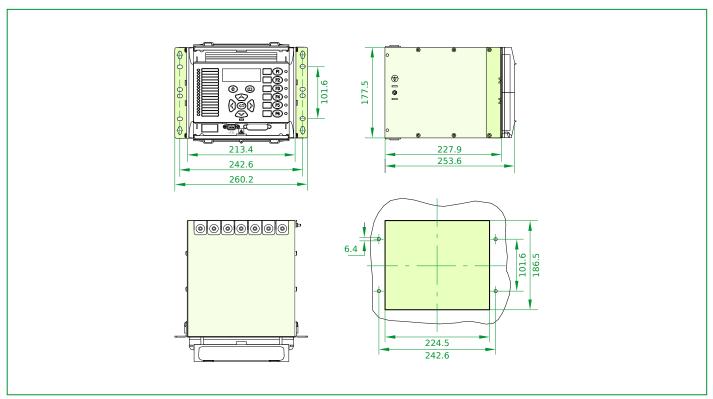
Flush-mounted case 40 TE with panel opening, flush-mount method 2 (with angle brackets and frame). (Dimensions in mm.)
